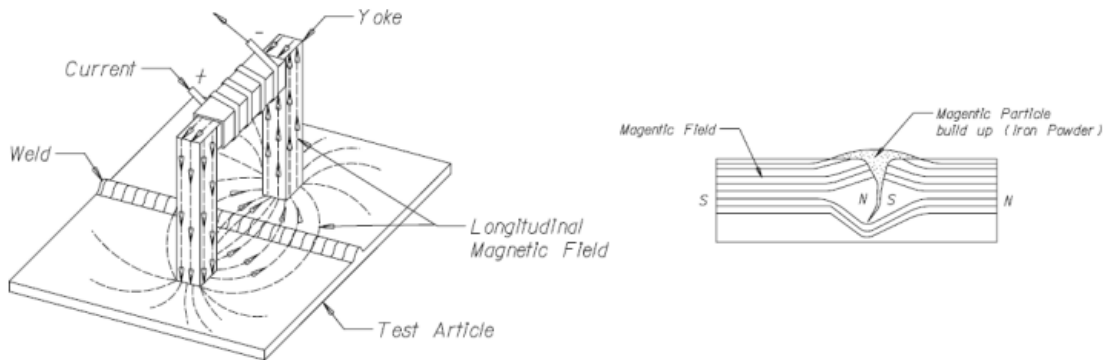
Magnetic Particle Testing of a Butt Weld
